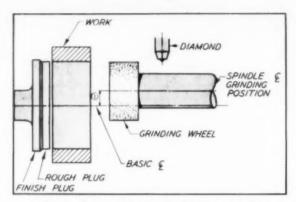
Gage-matic type of internal grinder. Transmitter of size control impulses is the plug gage shown ready to slip into the work. The infeed (1) is constant and continues until the rough plug slides in.
